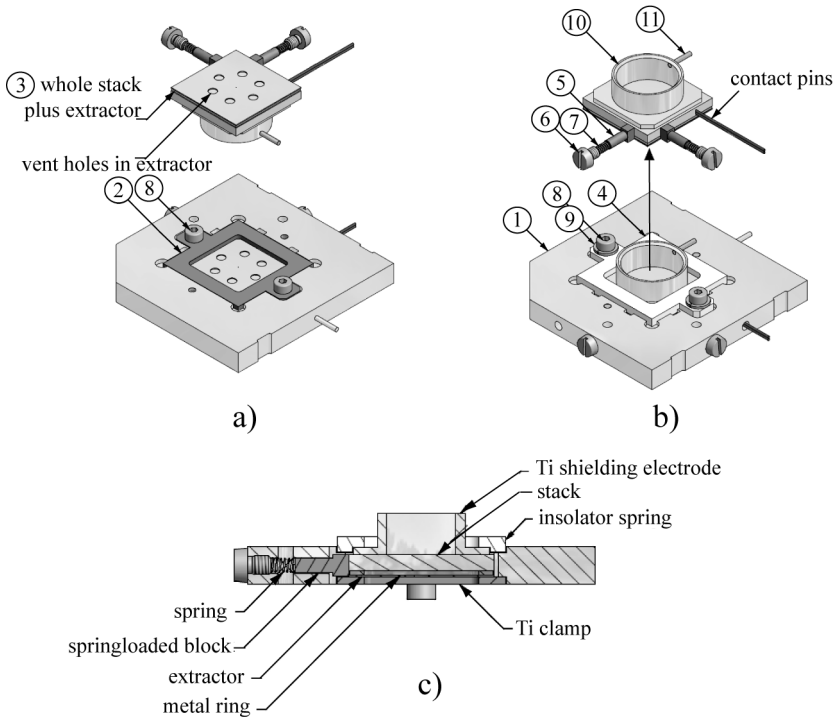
Mechanical drawing of the holder and optical stack; a) the front side (facing the emitter); b) the backside; and c) the cross-sectional view, with 1) holder, 2) Ti clamp, 3) optical stack, 4) ceramic clamp, 5) block, 6) screw, 7) non-magnetic spring, 8) screw, 9) spring washer, and 10) shielding electrode.
